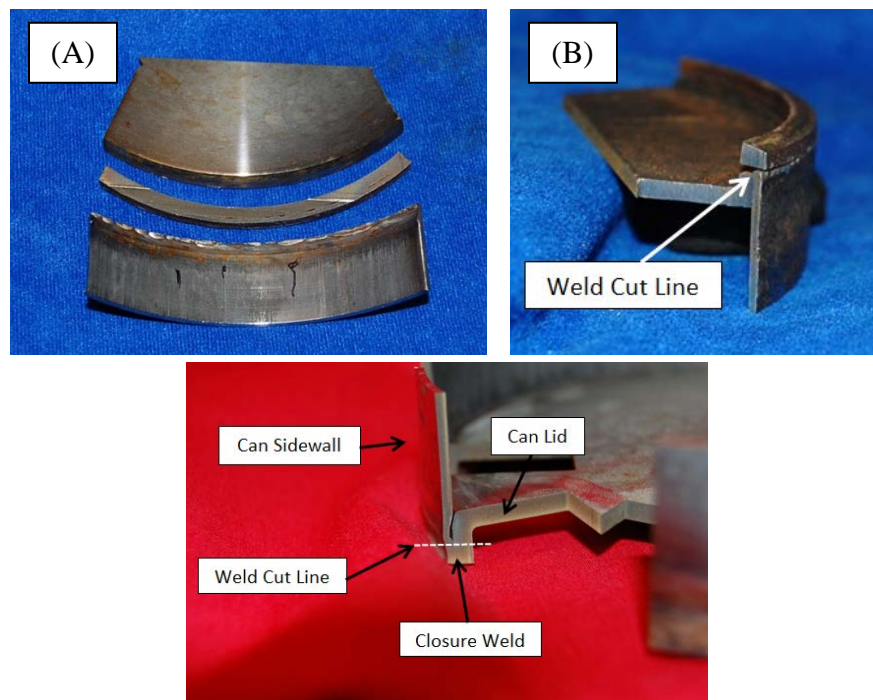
Removal of the inner can closure weld for separation of the can lid and sidewall quarters: (A) separated lid, sidewall, and closure weld of the inner can quarter section; (B) the pieces reconfigured into quarter section showing weld cut line; and (C) an inner can lid quarter section showing cross sectional view of gap size
